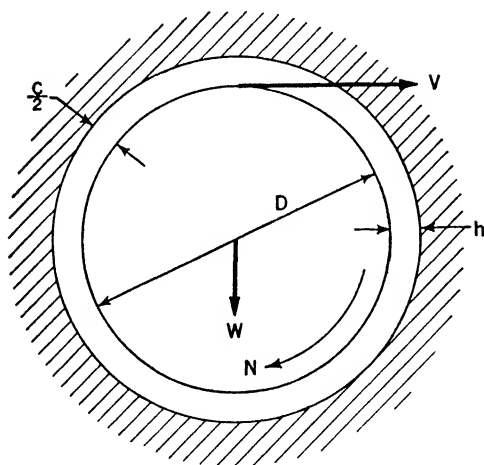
Definition sketch of a concentric journal bearing.
